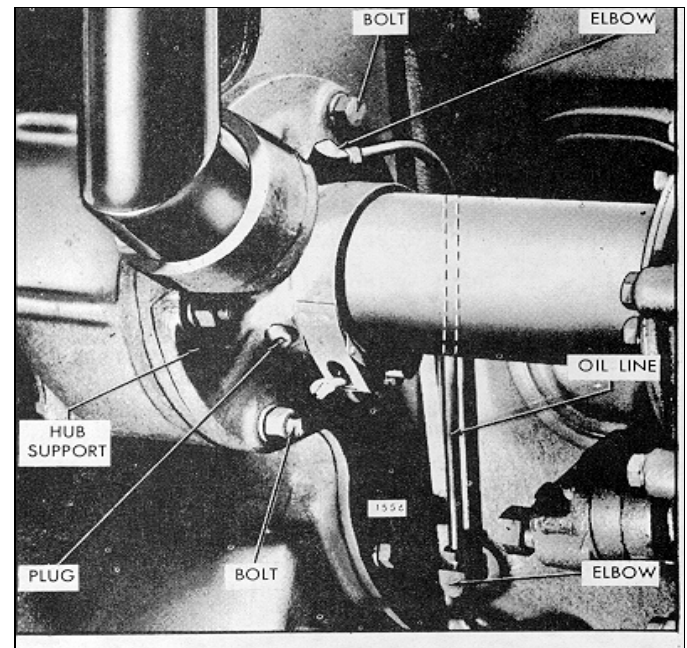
Blower Drive Gear and Support Assembly Mounting
